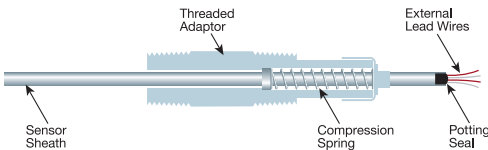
Bayonet Style Spring-Loaded Sensor Assembly
